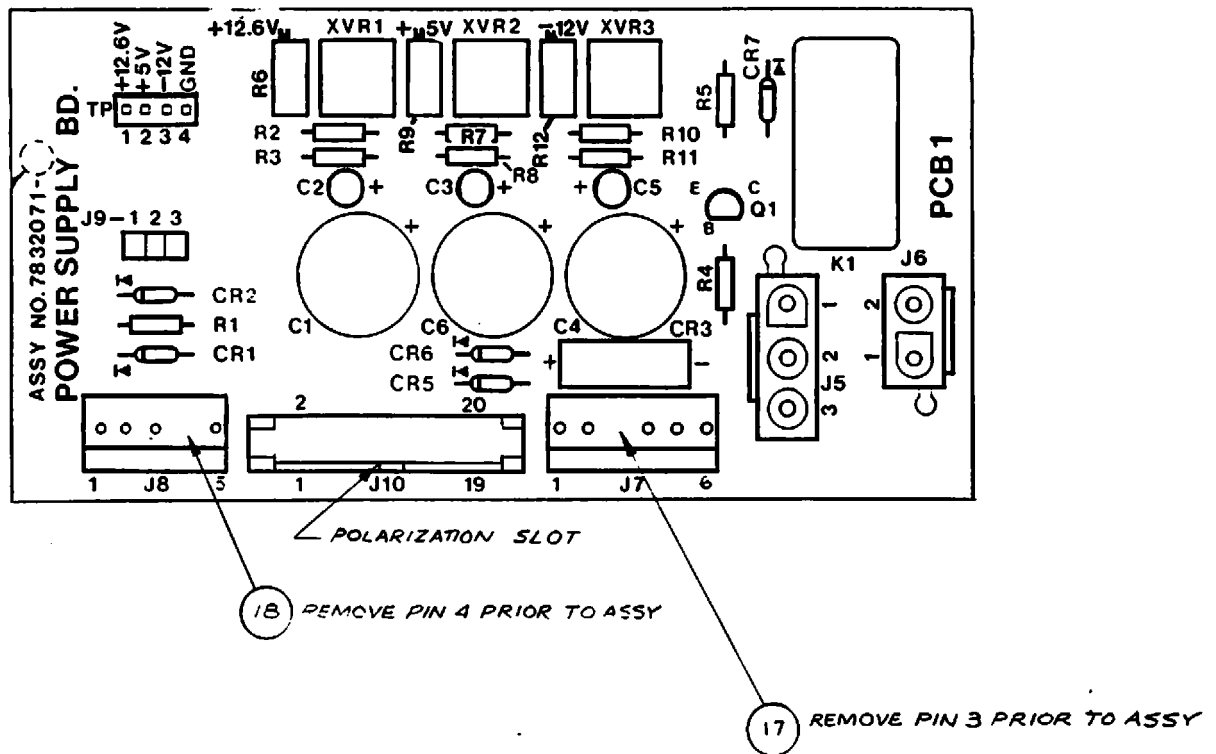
POWER MODULE POWER SUPPLY BOARD PCB1 PARTS LOCATION DIAGRAM
